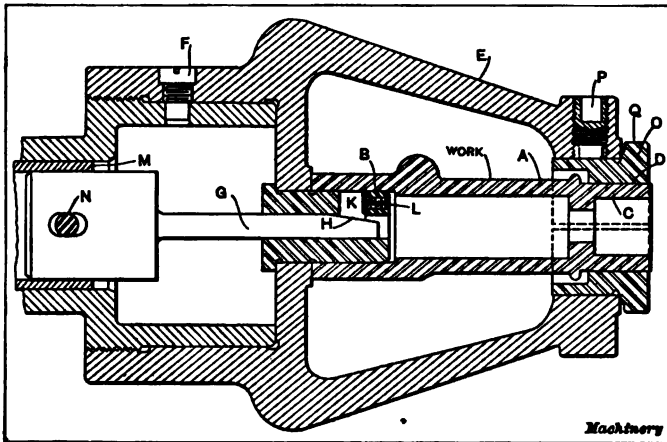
A Fixture which holds Work by Expansion and Contraction
